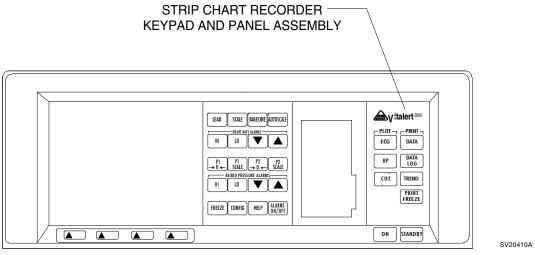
A: REPLACEMENT OF RECORDER KEYPAD AND PANEL ASSEMBLY
